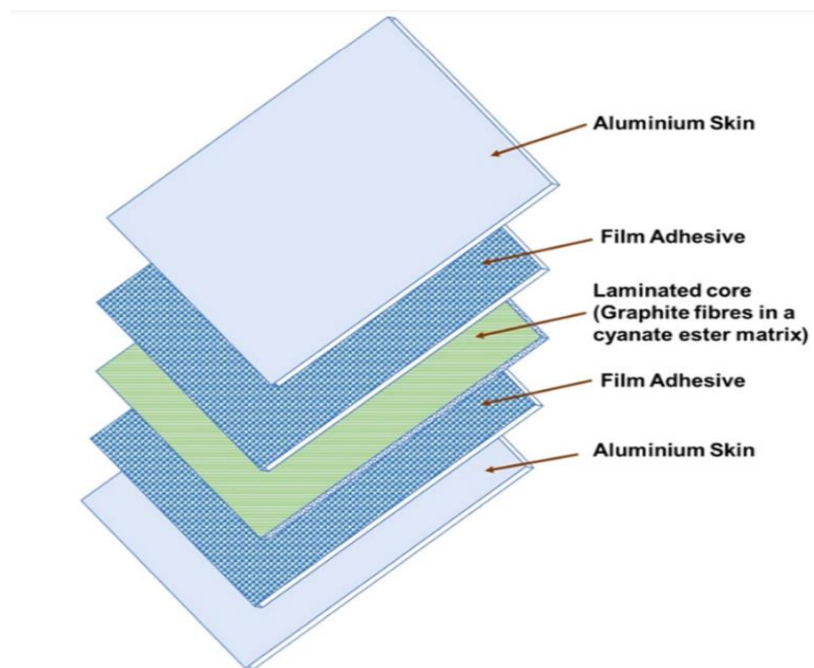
Lightweight laminated composite heat sink developed for printed circuit boards (Holz, Niemeyer and Puckett, 2000).
